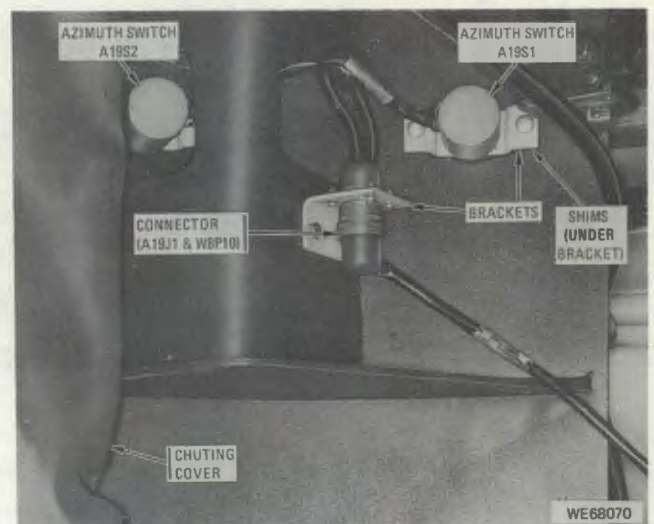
Turret subassembly, interior view showing azimuth switch assembly.
